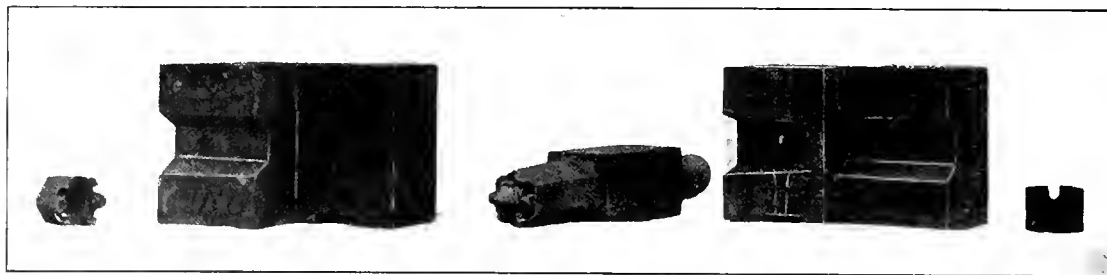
DIES AND HEADER FOR MAKING BRILL NUTS.
